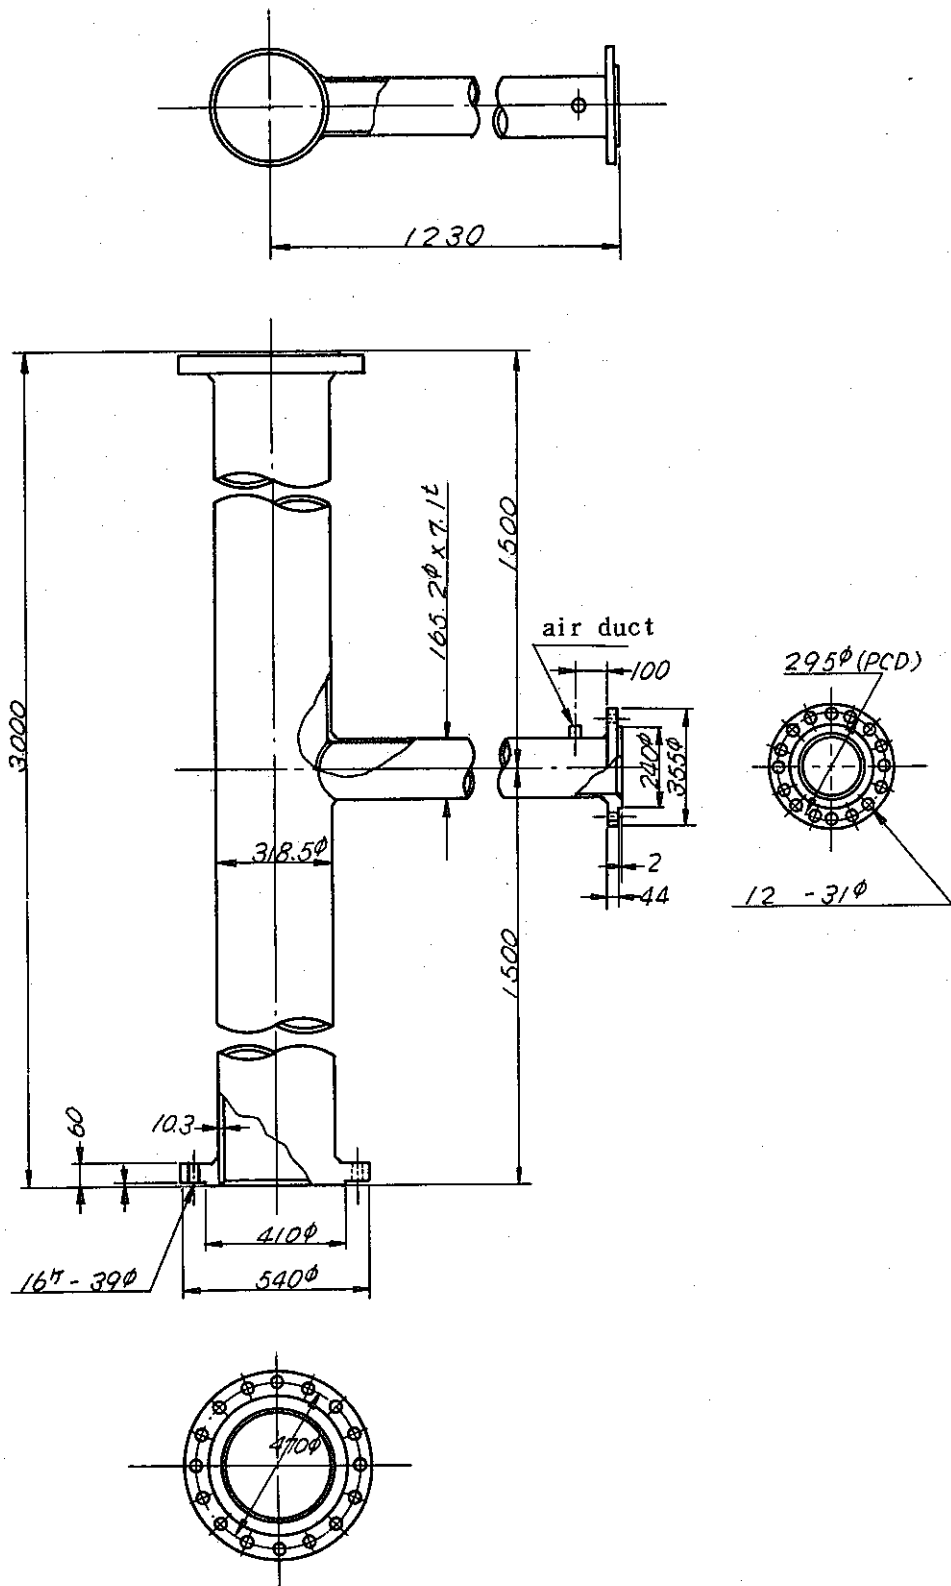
b) Shape of Branch Tube (12B - 6B)
